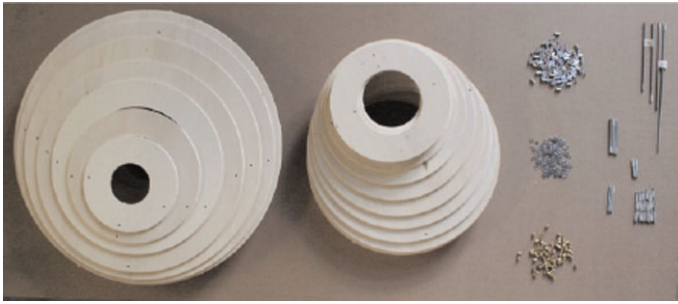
The kit of parts for assembling the “Nagashima!” prototype
